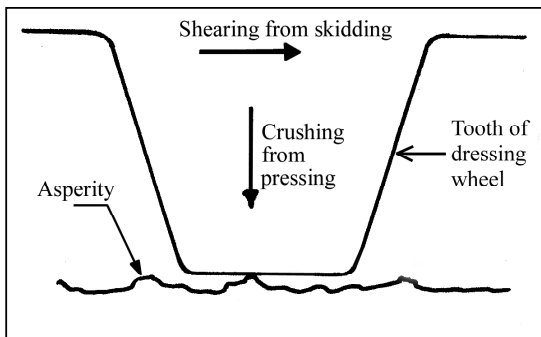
Wear mechanisms beneath a tooth of a dressing wheel
